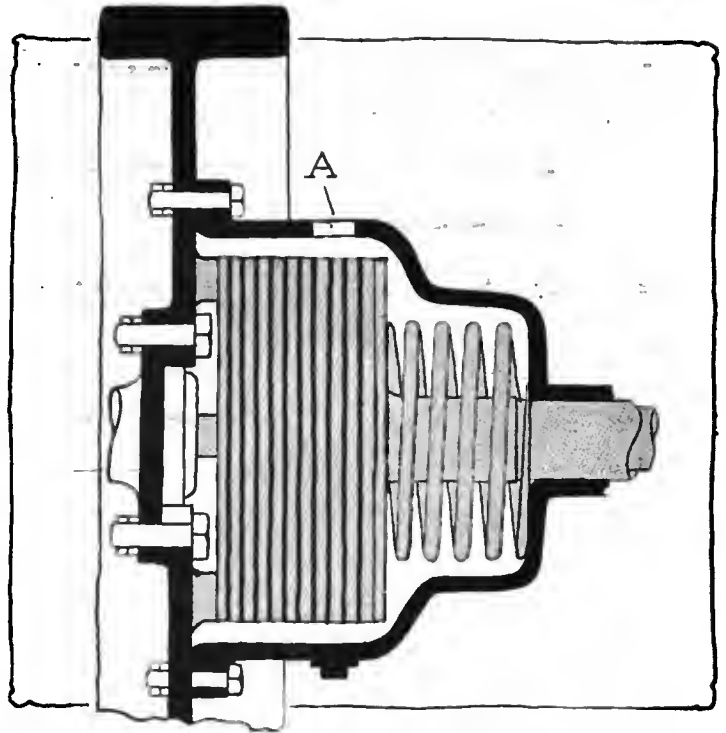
Clutch should be cleaned by introducing kerosene through A
